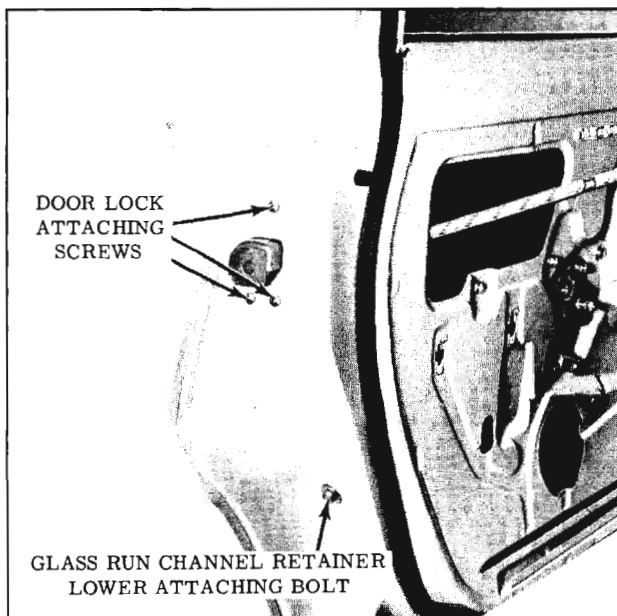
Rear Door Lock and Glass Channel Retainer Attachment
